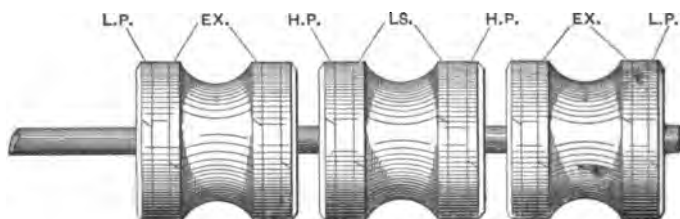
PISTON-VALVE OF FOUR-CYLINDER BALANCED COMPOUND.
